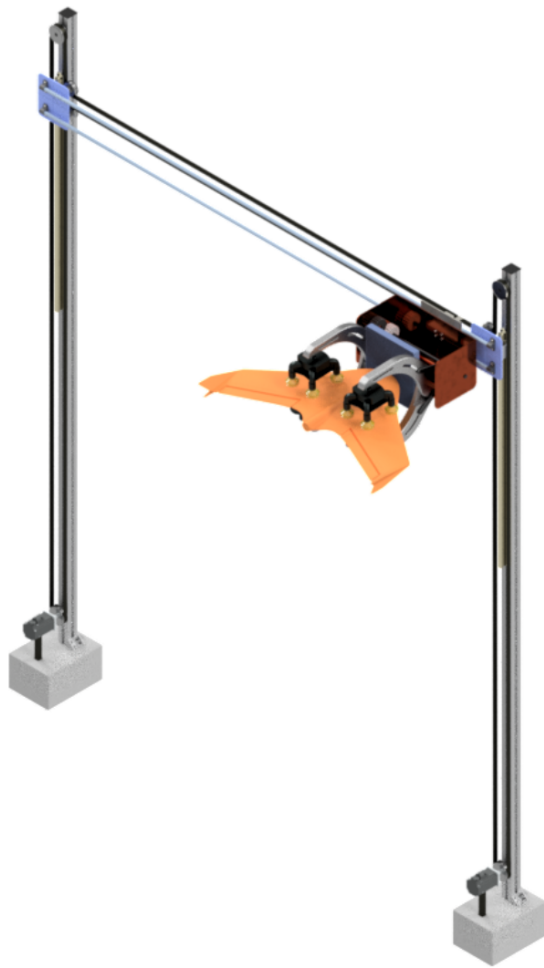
Assembly of the recovery system with a captured fixed-wing UAV
